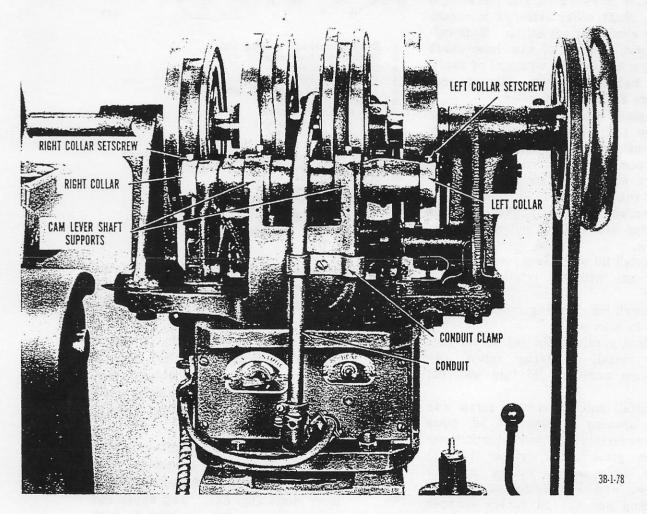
Cam lever shaft set collars installed on cam lever shaft.
